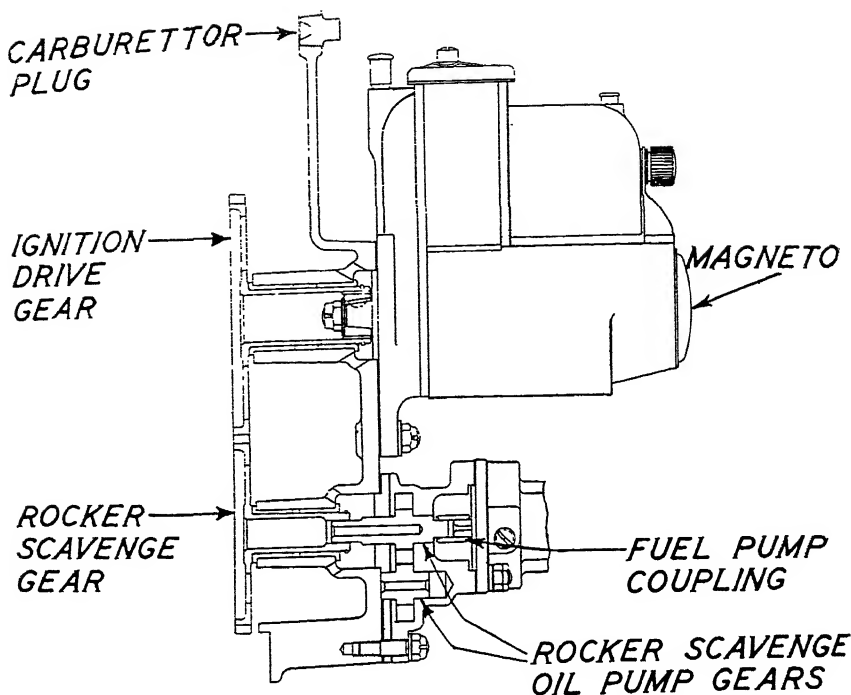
SECTION THROUGH MAGNETO DRIVE, ROCKER SCAVENGE AND FUEL PUMP DRIVE
